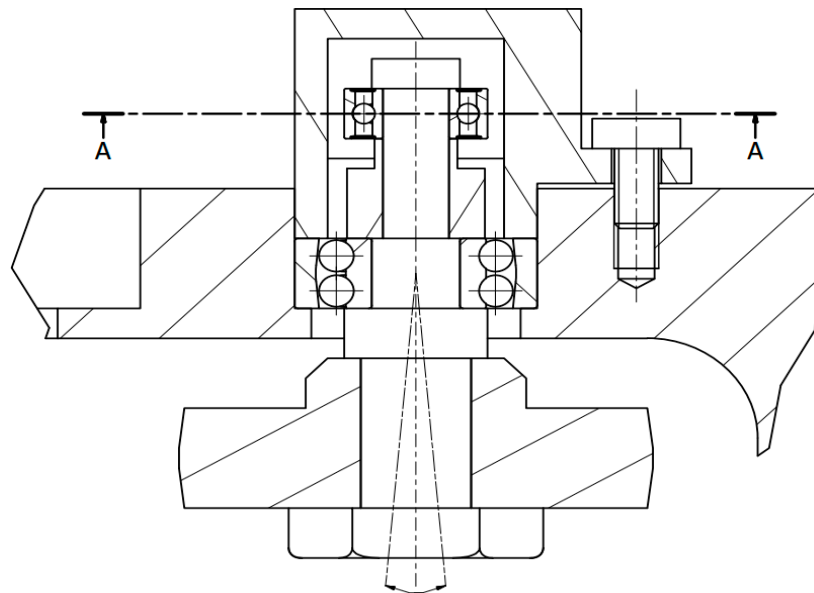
Detailed drawing of the intermediate friction wheel mechanism: the shaft can deflect around the self-aligning ball bearing center. The movement is limited to just one plane due to the ball bearing seated in the top of the shaft with its outer ring seated in an oblong as shown, in Section “A-A” (Figure 7).
